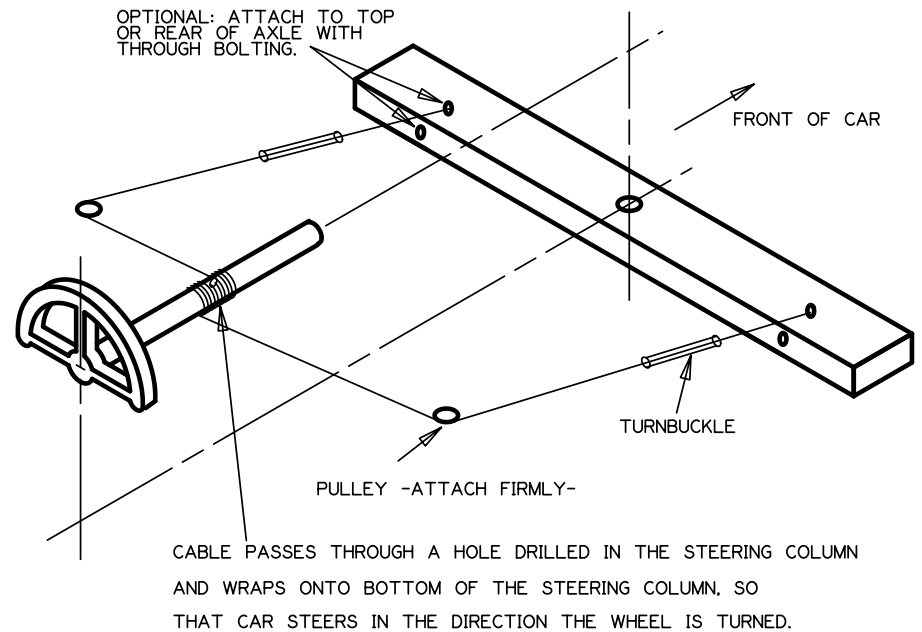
SUGGESTED STEERING ASSEMBLY
